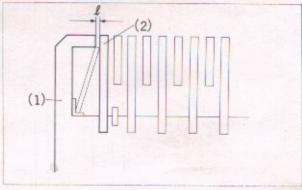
(1) Clutch center (2) Clutch plate B
